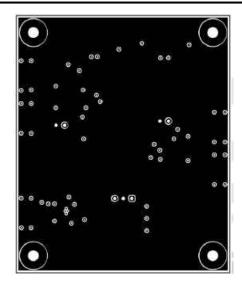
PCB Layout Example From LMK6 EVM - GND Layer 2
